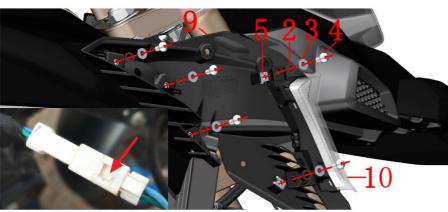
Fuel tank componenty		Fuel tank trim cover rear shell component	CHK	40)
